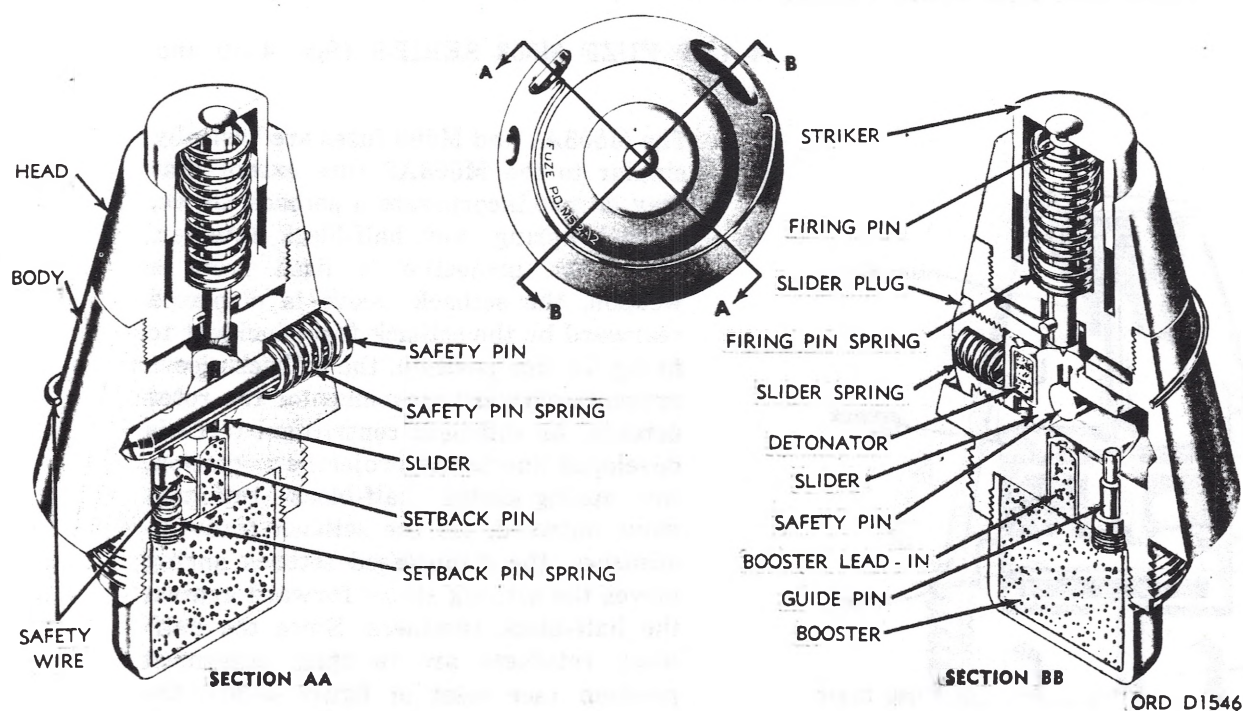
Fuze M52A2, Cutaway View Showing Unarmed Condition
